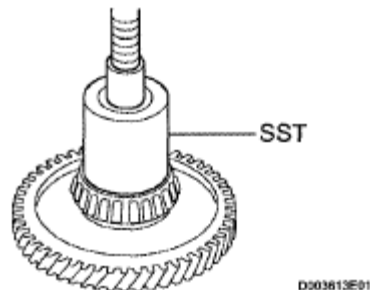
Installing Tapered Roller Bearing To Counter Drive Gear
